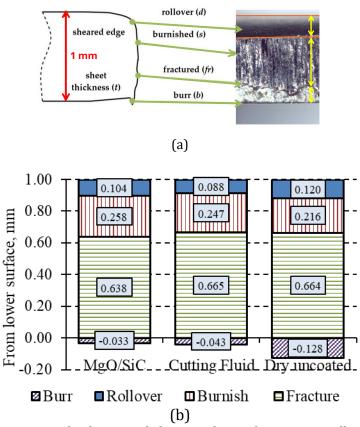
(a) cross-sectional scheme and the one obtained experimentally (front view); (b) depth rollover, burnished, fracture and burr at sheared edge by using DLC/TiAlN coated punch and lubricant.
